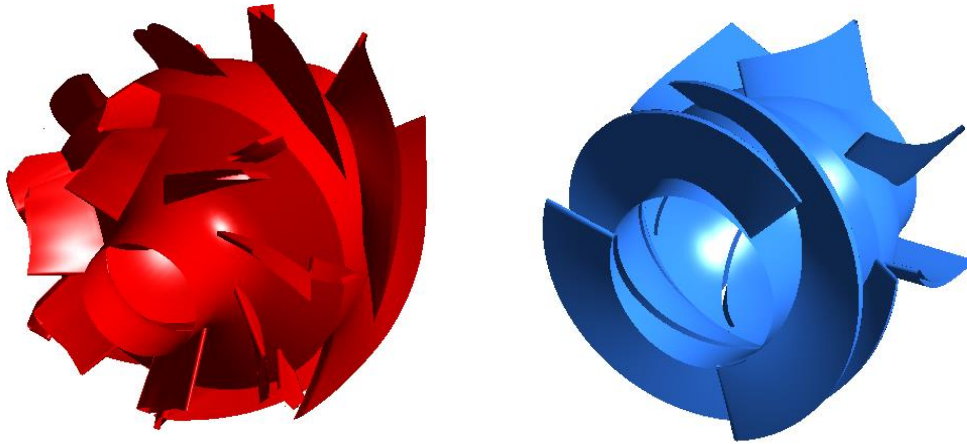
a) Split vane impeller pump b) Helicoaxial pump
